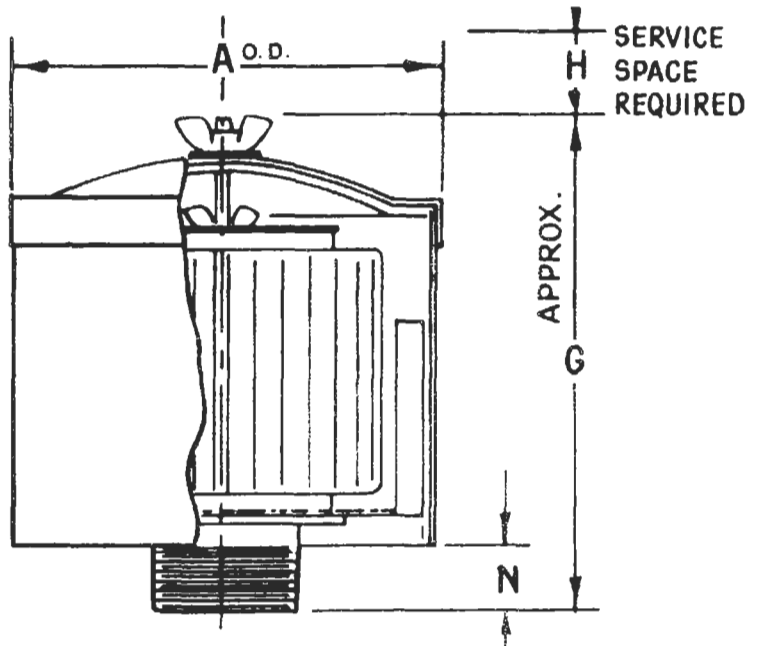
Typical blower intake filter-silencer. Air to blower leaves through pipe connection, which may be screwed or flanged. Courtesy of Dollinger Corp.
